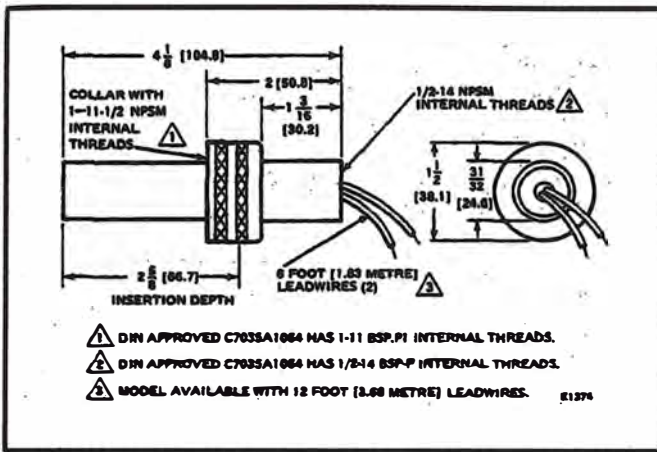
INSTALLATION DIMENSIONS OF THE C703SA, IN in. [mm IN BRACKETS].
